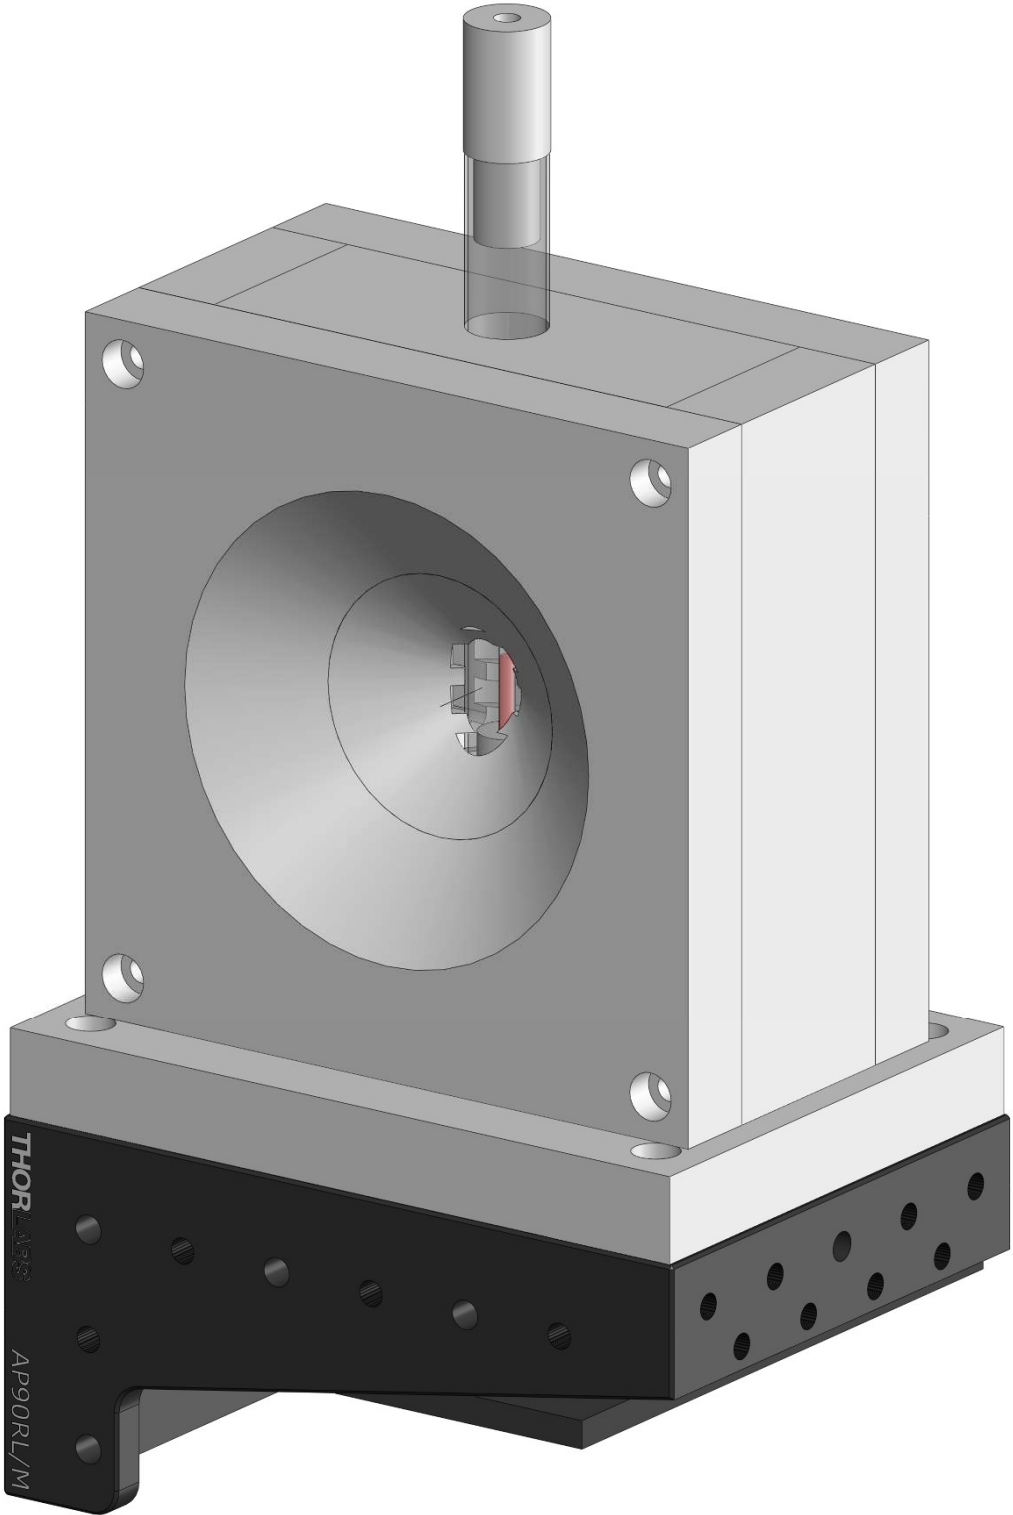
The CAD drawing of assembled furnace used in I12 and DIAD beamlines.
